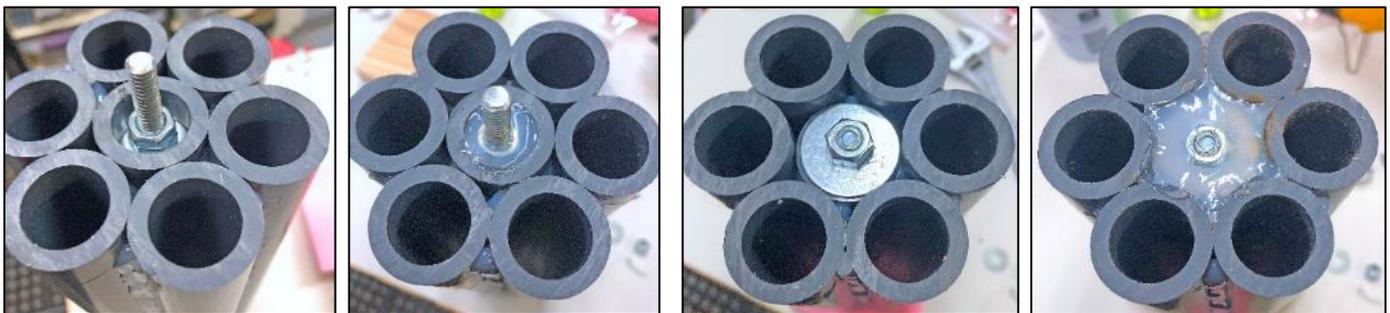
The Bottom and Top with the Clamping Rod installed and the recess filled with hot melt glue.
